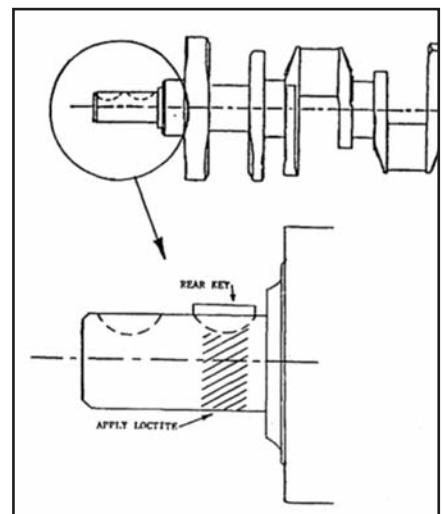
The thread locking material should not be applied to the sprocket inside diameter but to the crankshaft post for 360 degrees at the rear crankshaft key area only.
